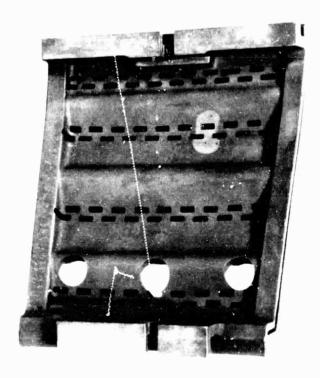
Combustor Component Inner Rear Advanced Liner Segment
